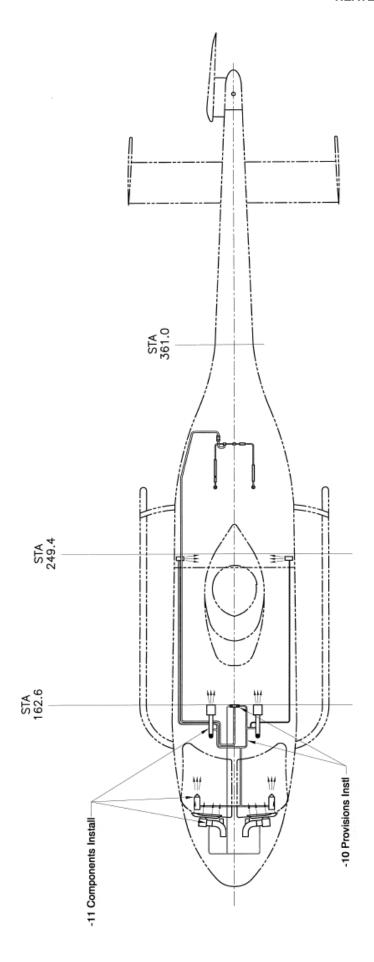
Cabin Heater General Arrangement (View looking down)
